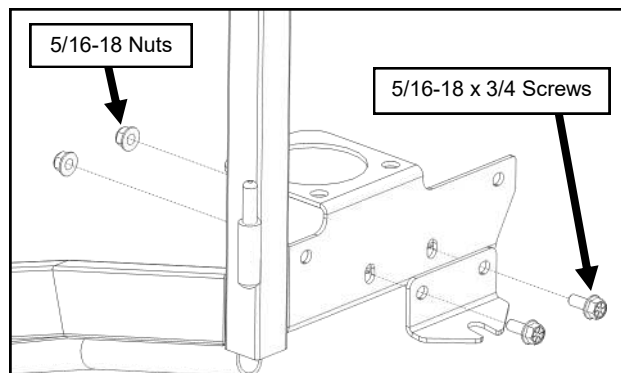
(Pre-Assemble Bracket to Side Frame)
